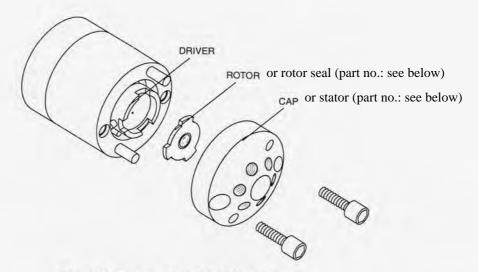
Exploded view of the Model C2 (here: 2-position/6-port valve)
